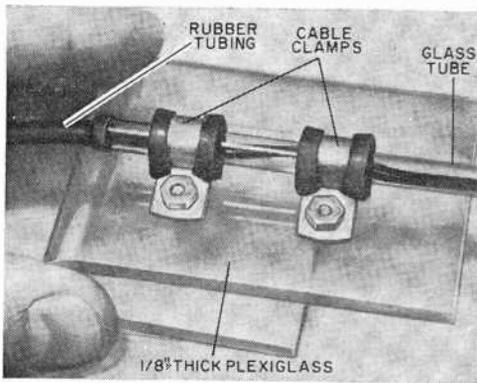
Sensing probe assembly mounts on plastic bracket with cable clamps and #6 hardware. Do not overtighten clamps or the glass tube will break.
